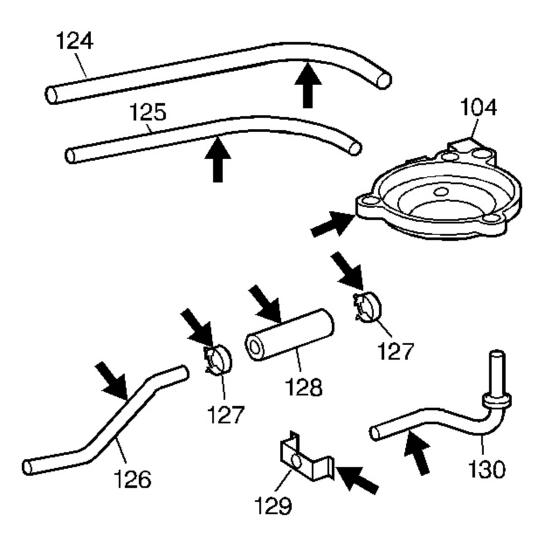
Identifying Servo And Lube Oil Pipe Components Courtesy of GENERAL MOTORS CORP.
